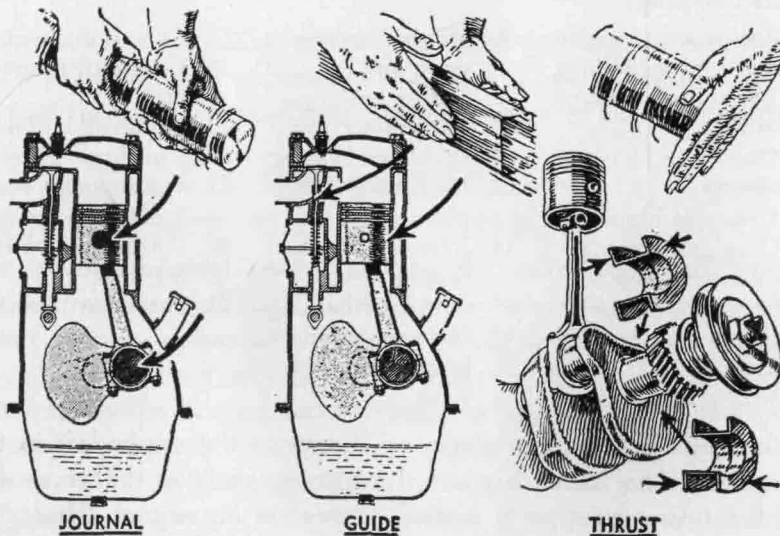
Three types of friction-bearing surfaces in engine.
